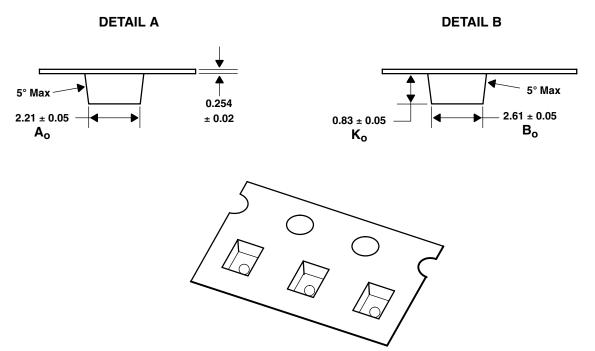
Package FN — Dual Flat No-Lead Packaging Configuration
